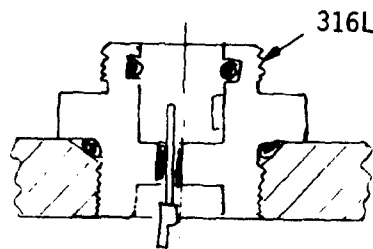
illustrates the various MIL-C-24217 receptacles which are attached to components with threaded fasteners. MIL-C-24217/4 and 12 receptacles contain a mounting flange midway along the sleeve with bolt holes and an O-ring seal groove for mounting. MIL-C-24217/5 is identical except for the flange being at the inboard end of the receptacle sleeve. MIL-C-24217/6 is a mid-flange receptacle similar to the bolted version, except that retention is accomplished by a large nut which is threaded onto the inboard end of the receptacle sleeve. Threaded or bolted receptacles have the advantage of easier maintainability due to ease of replacement.
